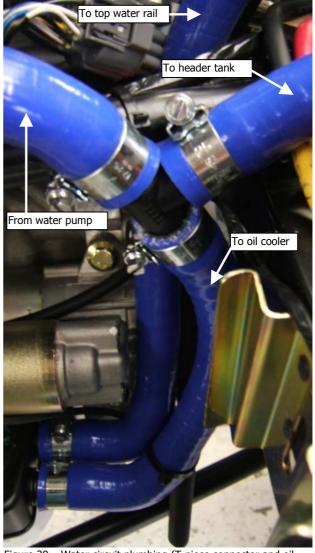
Water circuit plumbing (T-piece connector and oil cooler)
